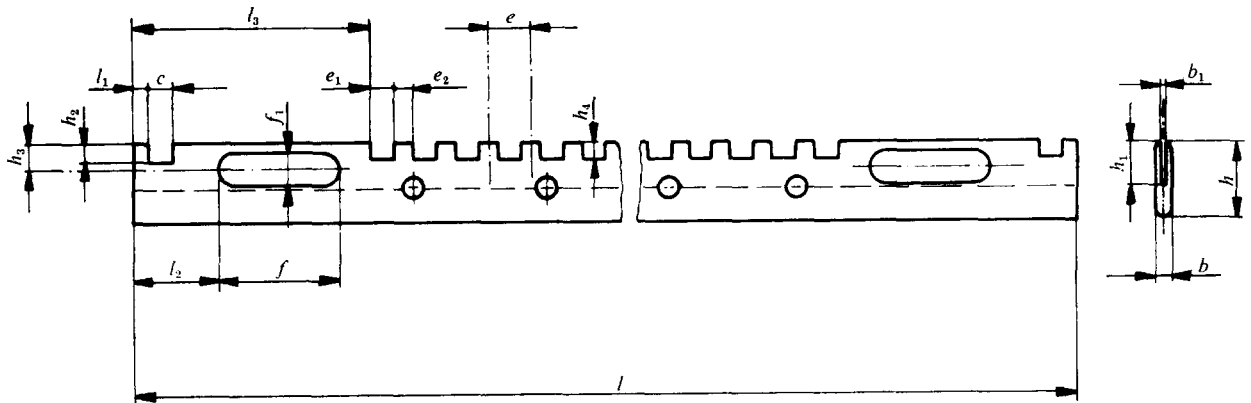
Outer serrated fixed bar FIG. 1 — Tringle crénelée extérieure fixe
